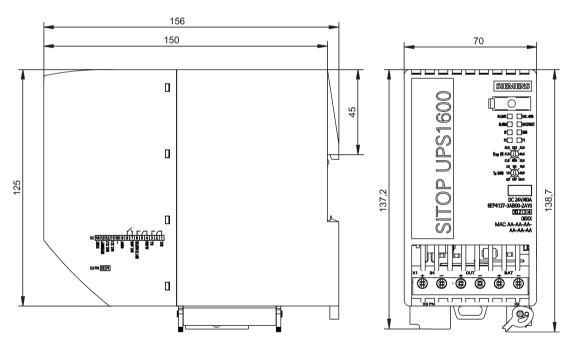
Dimension drawing 6EP4137-3AB00-2AY0
